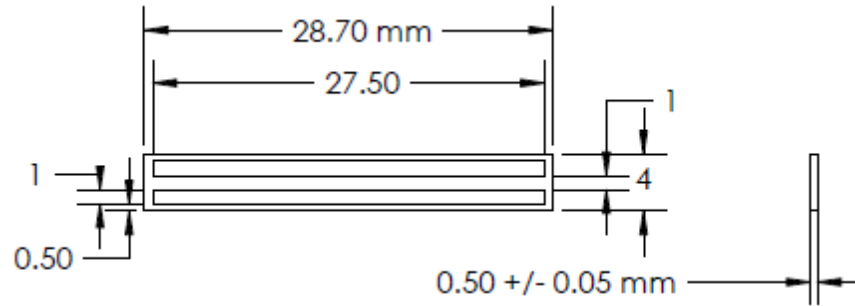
Drawing of soft aluminum gasket used to provide a gas-tight seal between combustors and gas distribution manifolds.
